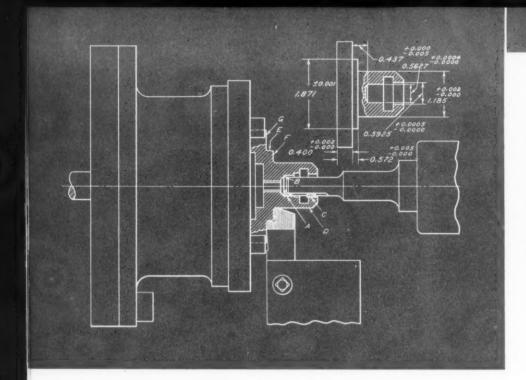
Arrangement of Cutting Tools for Operation Shown in Fig. 8. Boring-bar Cuts Diameters A and C and Faces Inside Shoulder B. Double-pointed Cutting Tool Turns Diameters D and E and Faces Shoulders F and G
